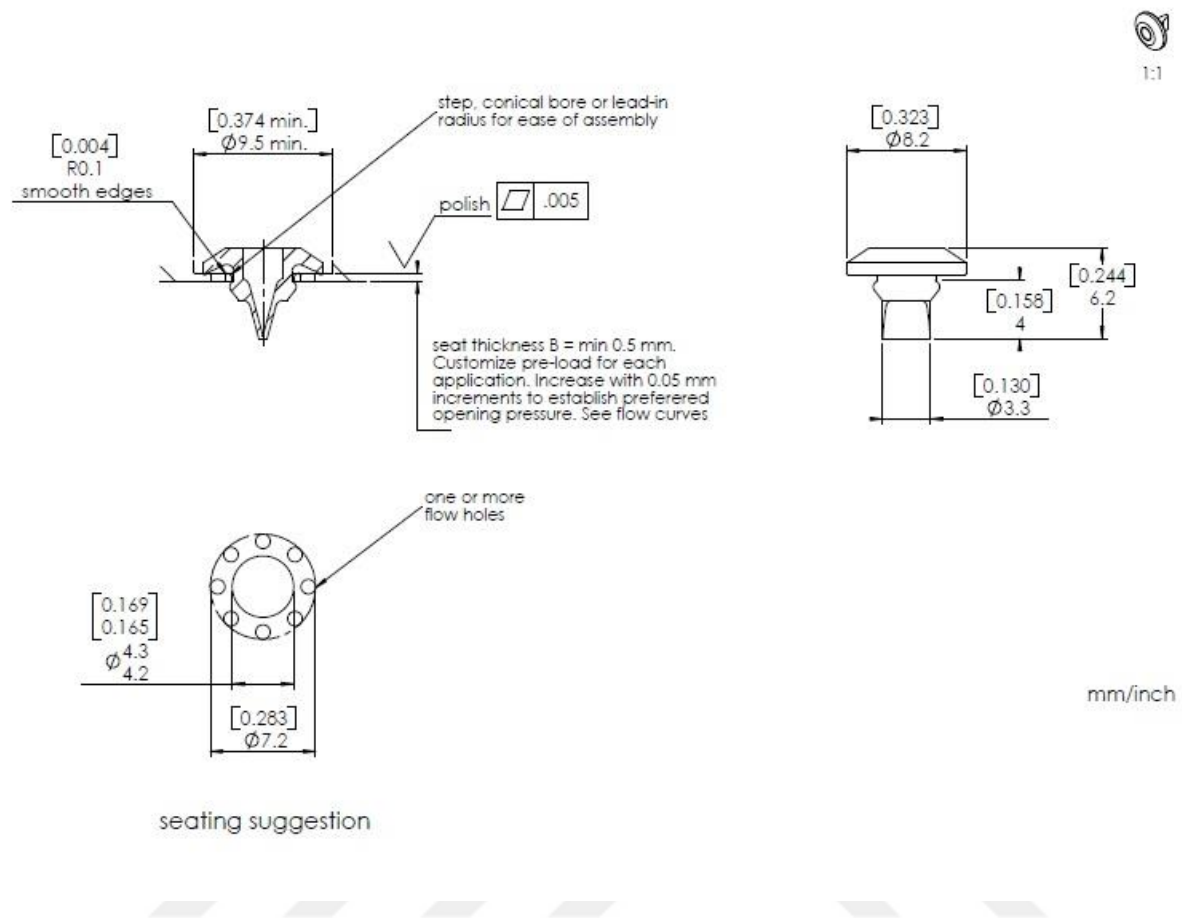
Technical drawing of the 8.2 mm duckbill-umbrella combination valve [36]
